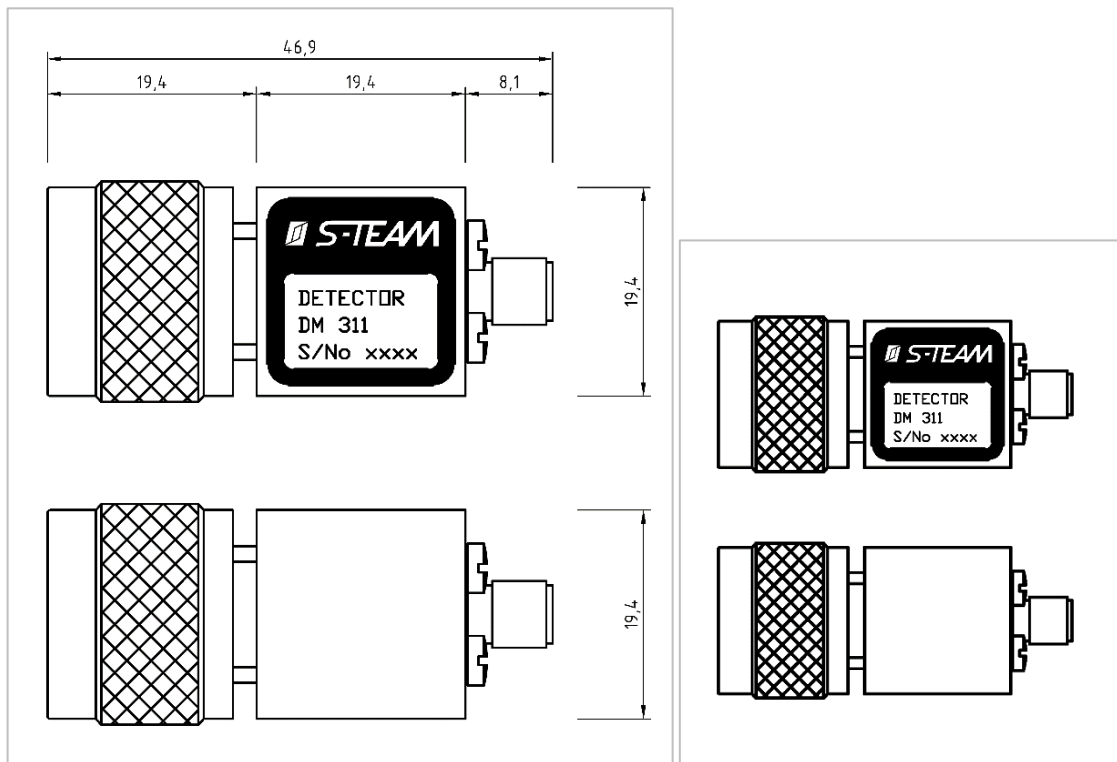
Basic DM311 dimensions in millimeters. Right: Actual size.
